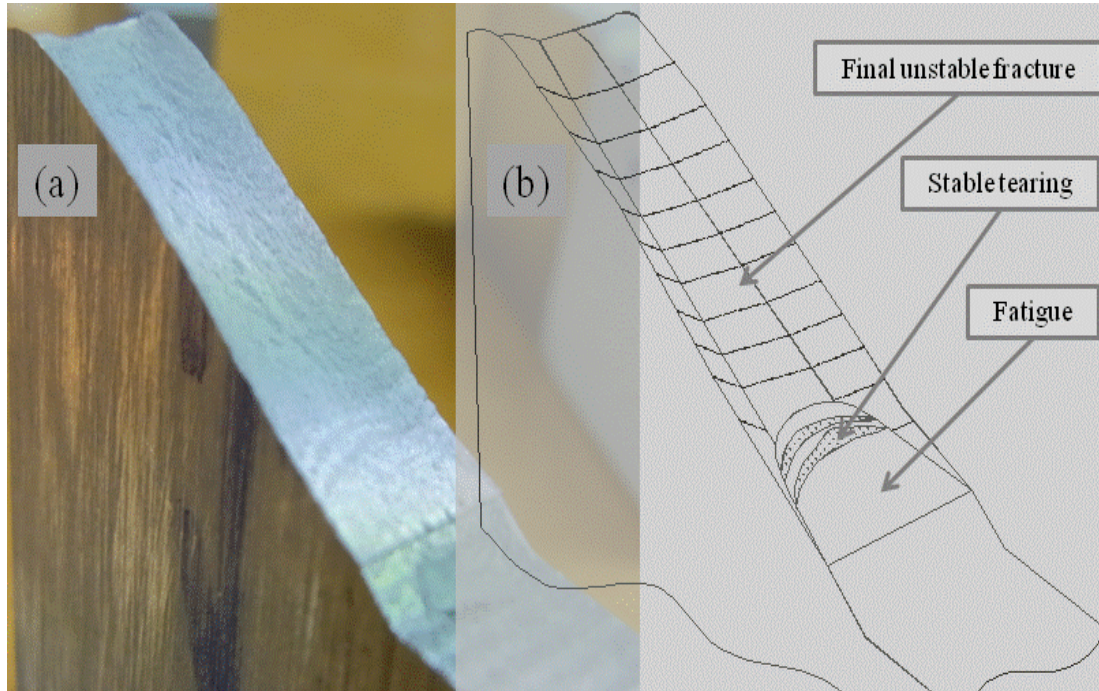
Transition of fatigue-tearing crack growth under CA fatigue appears to be associated with transformation from flat to slant fracture surface (specimen CA1).
